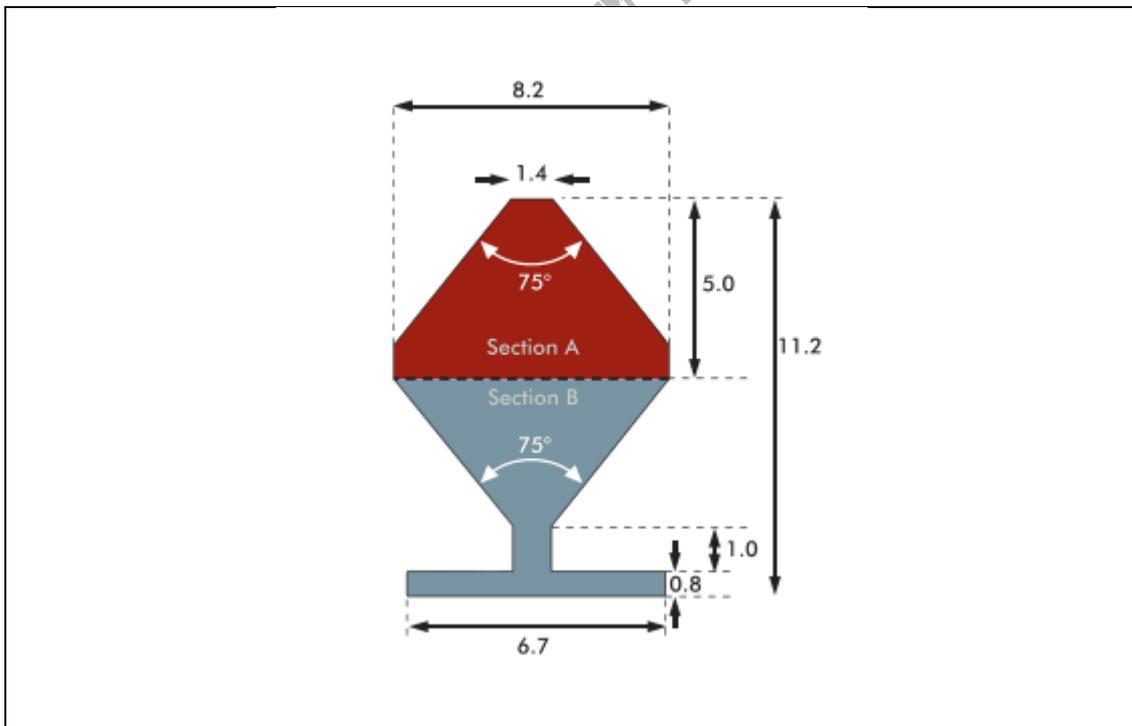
Toddler partially bound probe (dimensions in inches, template is 0.60 inches thick)
